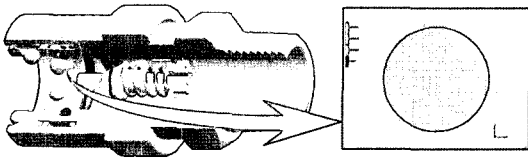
LPG filling unit and FEM elements of O-ring and rectangular groove.
